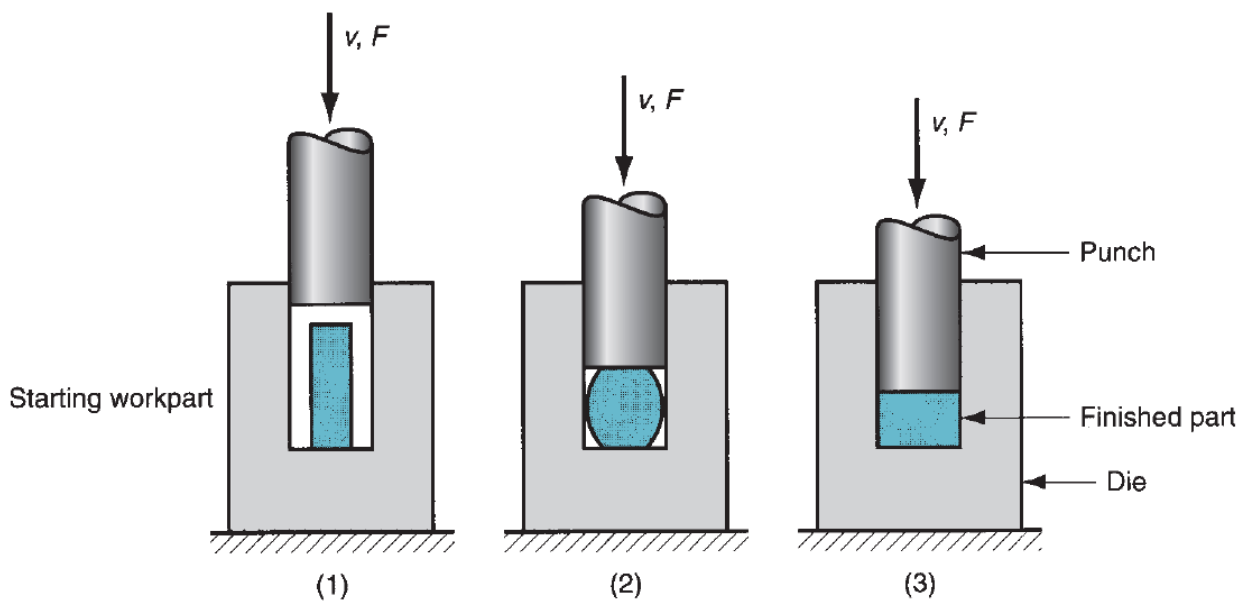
Flashless forging: (1) just before initial contact with workpiece, (2) partial compression, and (3) final punch and die closure.
